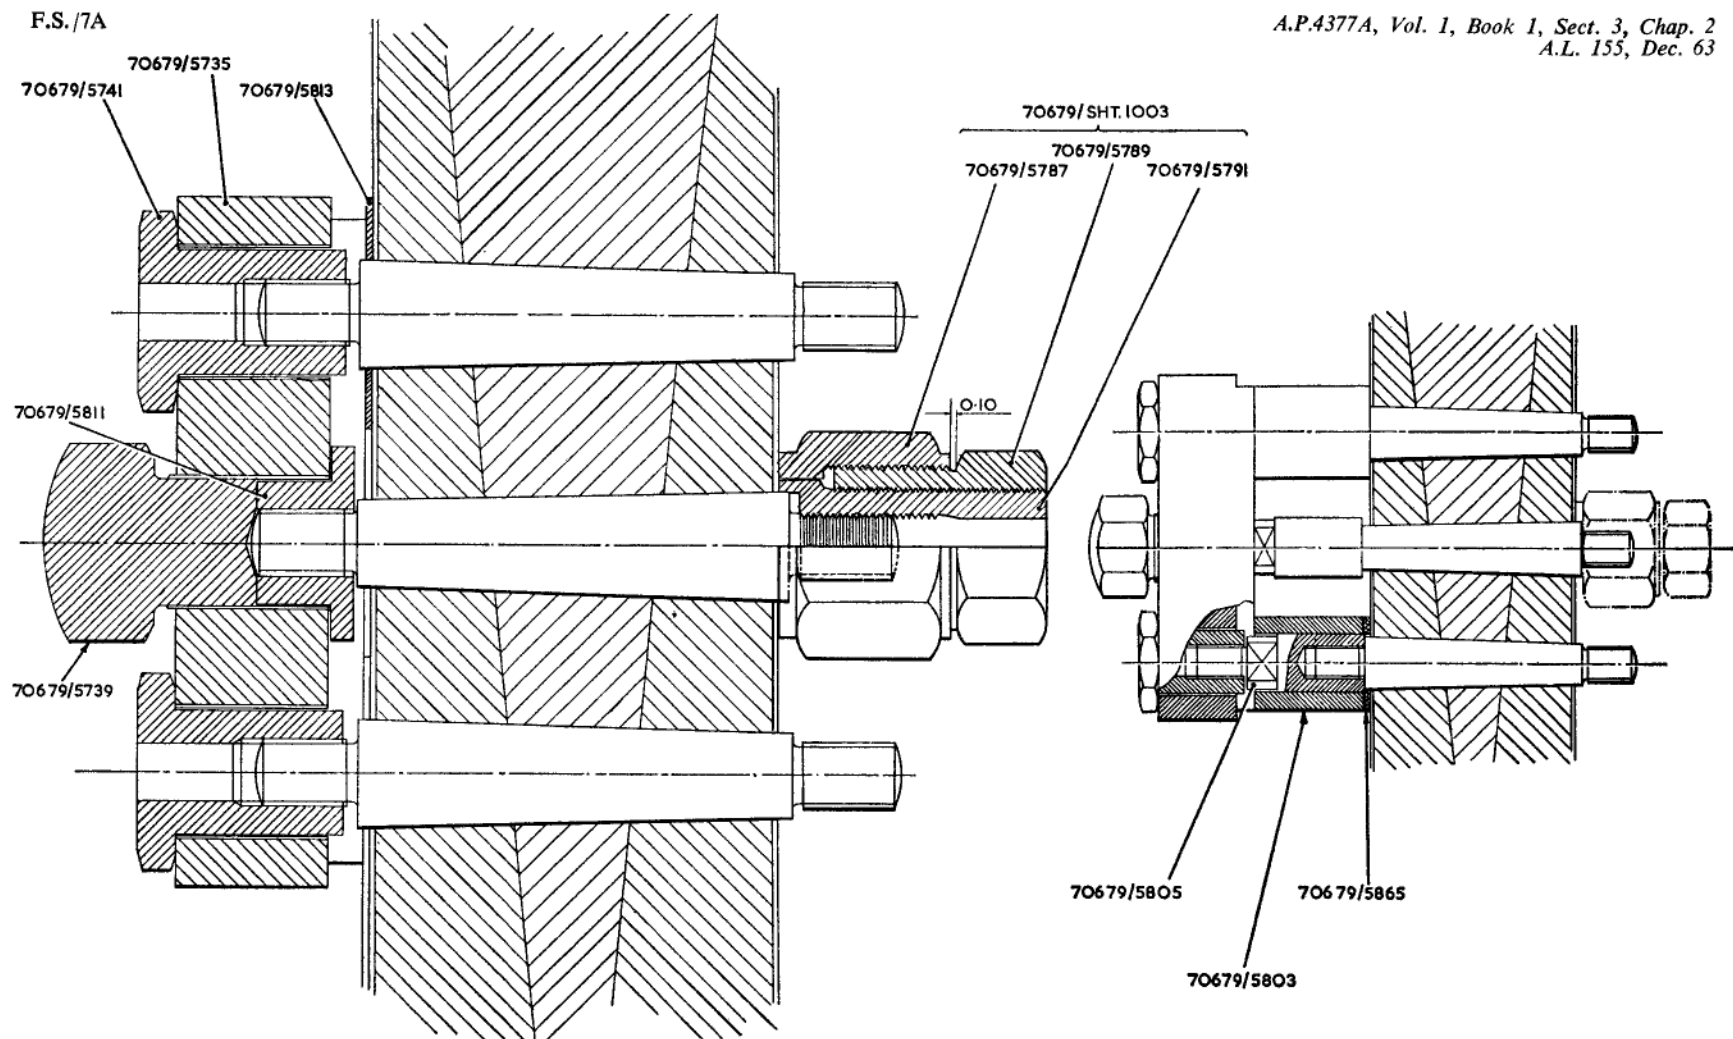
A. Extractor, outer to inner plane spar joint taper bolts
